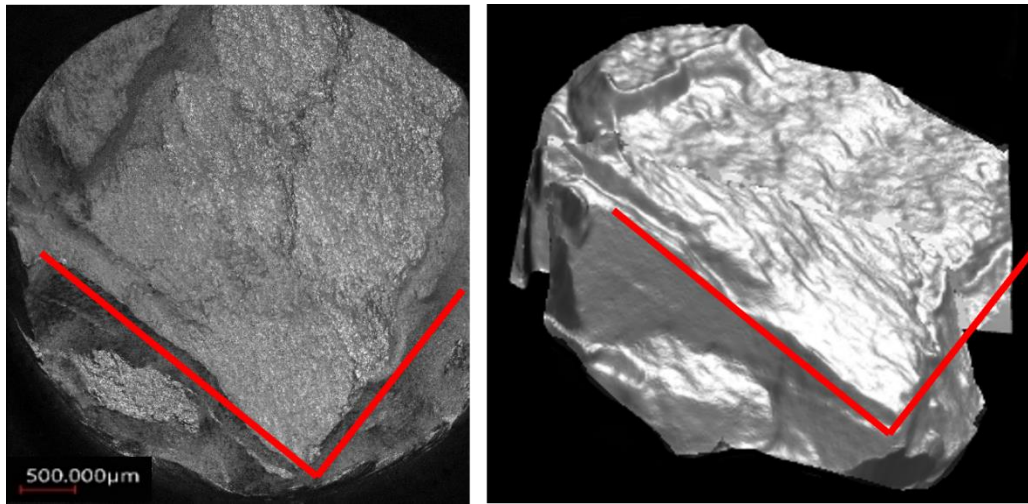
The fracture surface (left) and the topography (right) showed some ledges with a sharp corner outlined in red.
